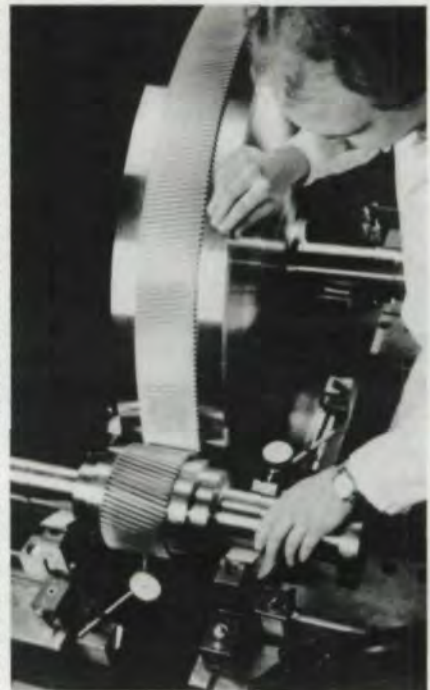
A contact check in a test fixture is a crucial step in correcting misalignment.
